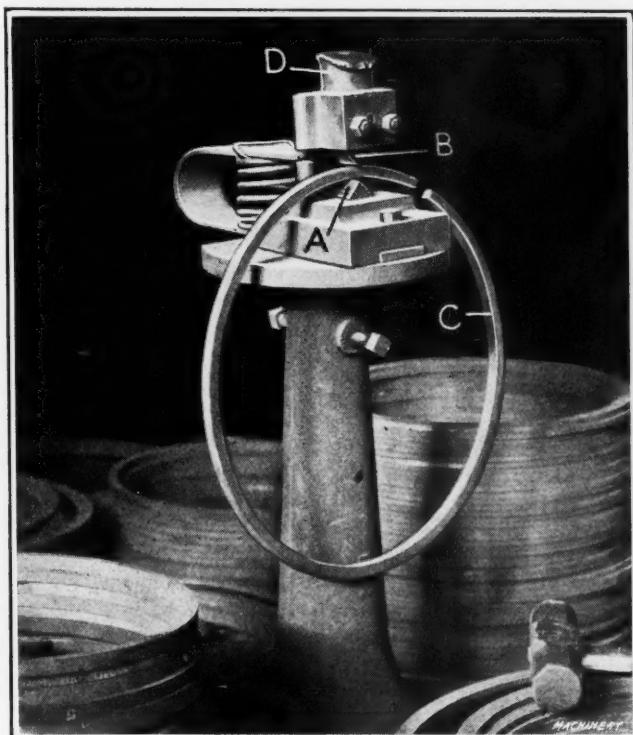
Special Machine developed to provide a Rapid Means of cutting Segment from Piston-rings
